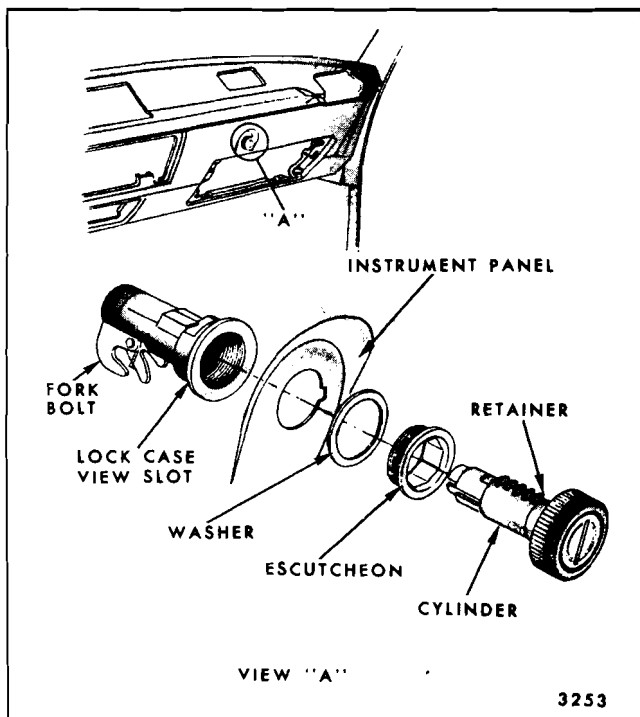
Instrument Panel Compartment Door Lock and Cylinder - Buick "A & E" Styles, Chevrolet Typical
